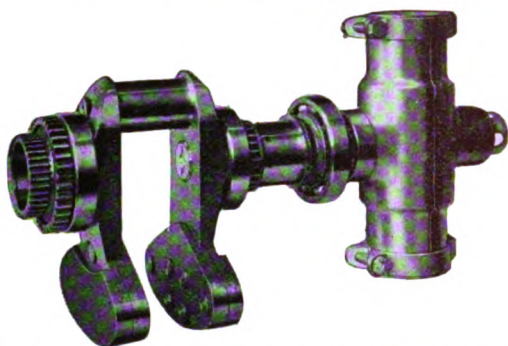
Crankshaft assembly of the air-cooled Hornet motor. Courtesy of Pratt & Whitney Aircraft Company, Hartford, Conn.
